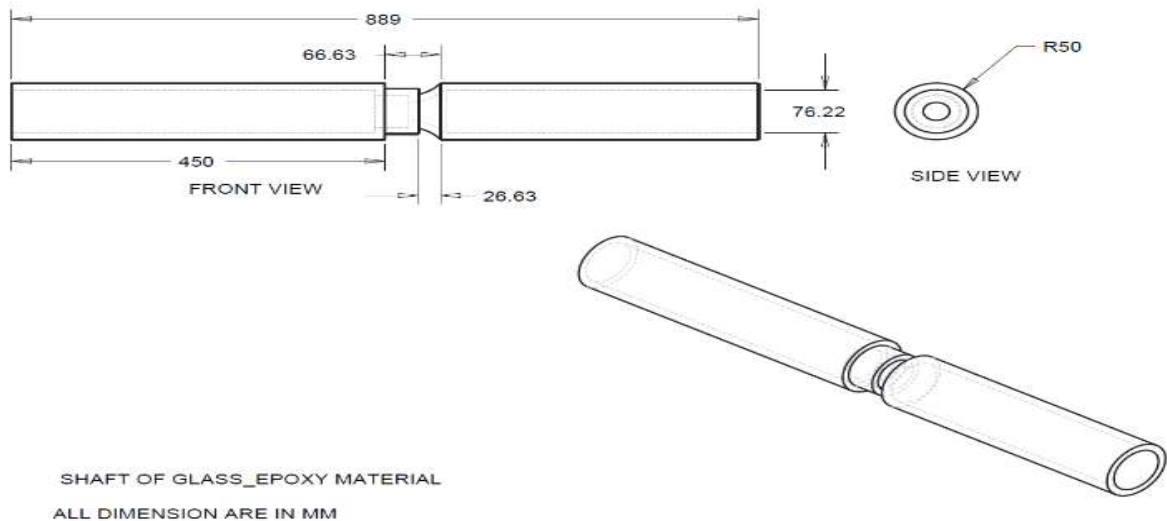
Drafting Model of Propeller Shaft for Glass Epoxy
